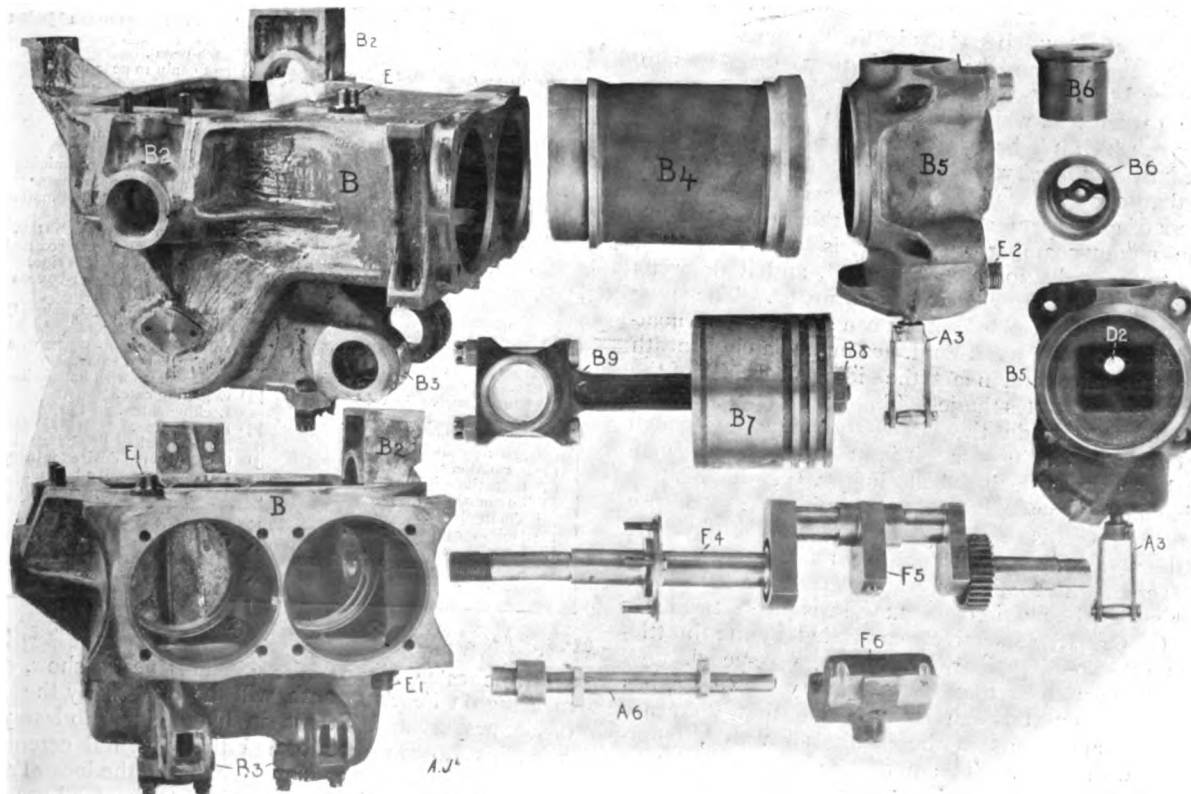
Some of the most important component parts of the 8-h.p. Wolseley Engine, showing the method of its construction.
